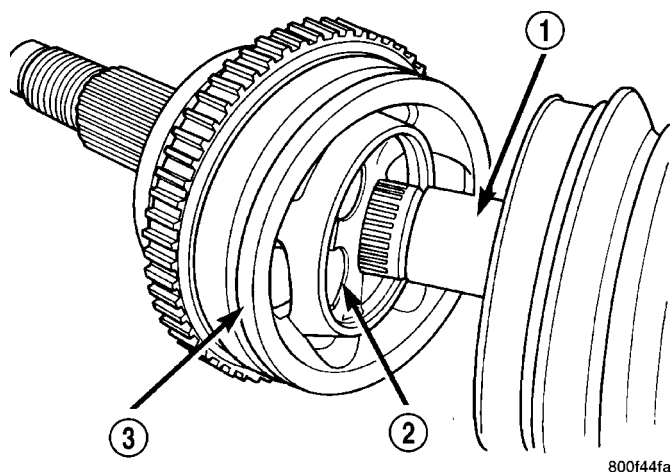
Outer C/V Joint Correctly Installed on Interconnecting Shaft
